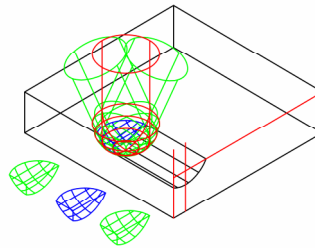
Ball end milling with tilt and lead angle (uncut chip).
